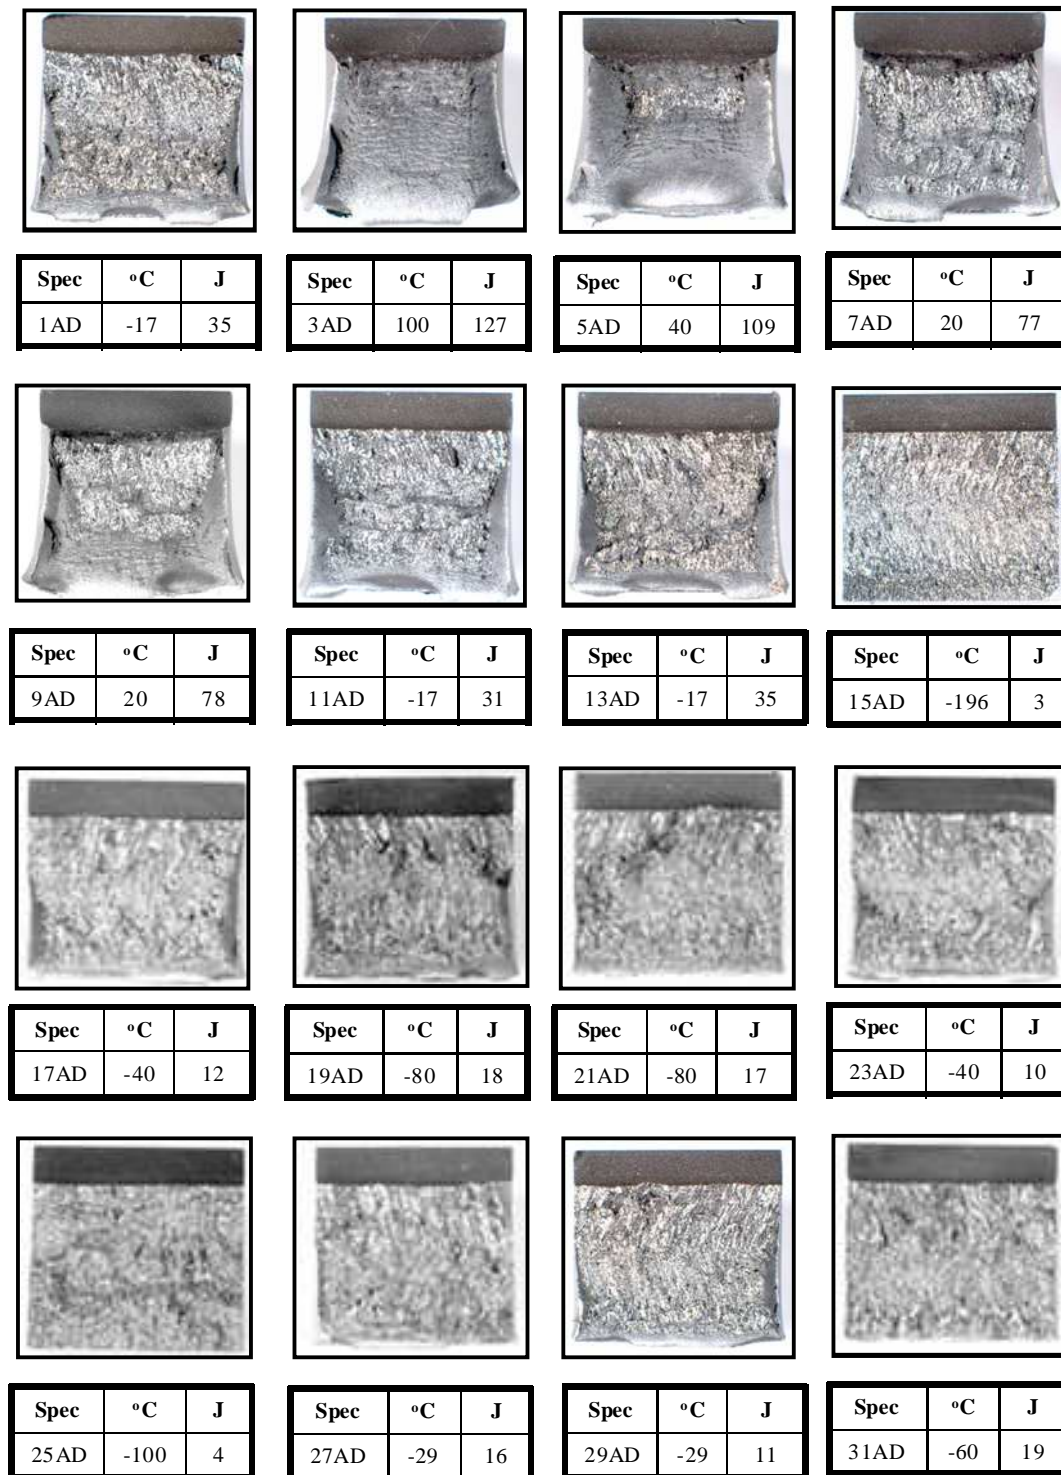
Charpy impact fracture surfaces for the ADAR microstructural condition.
